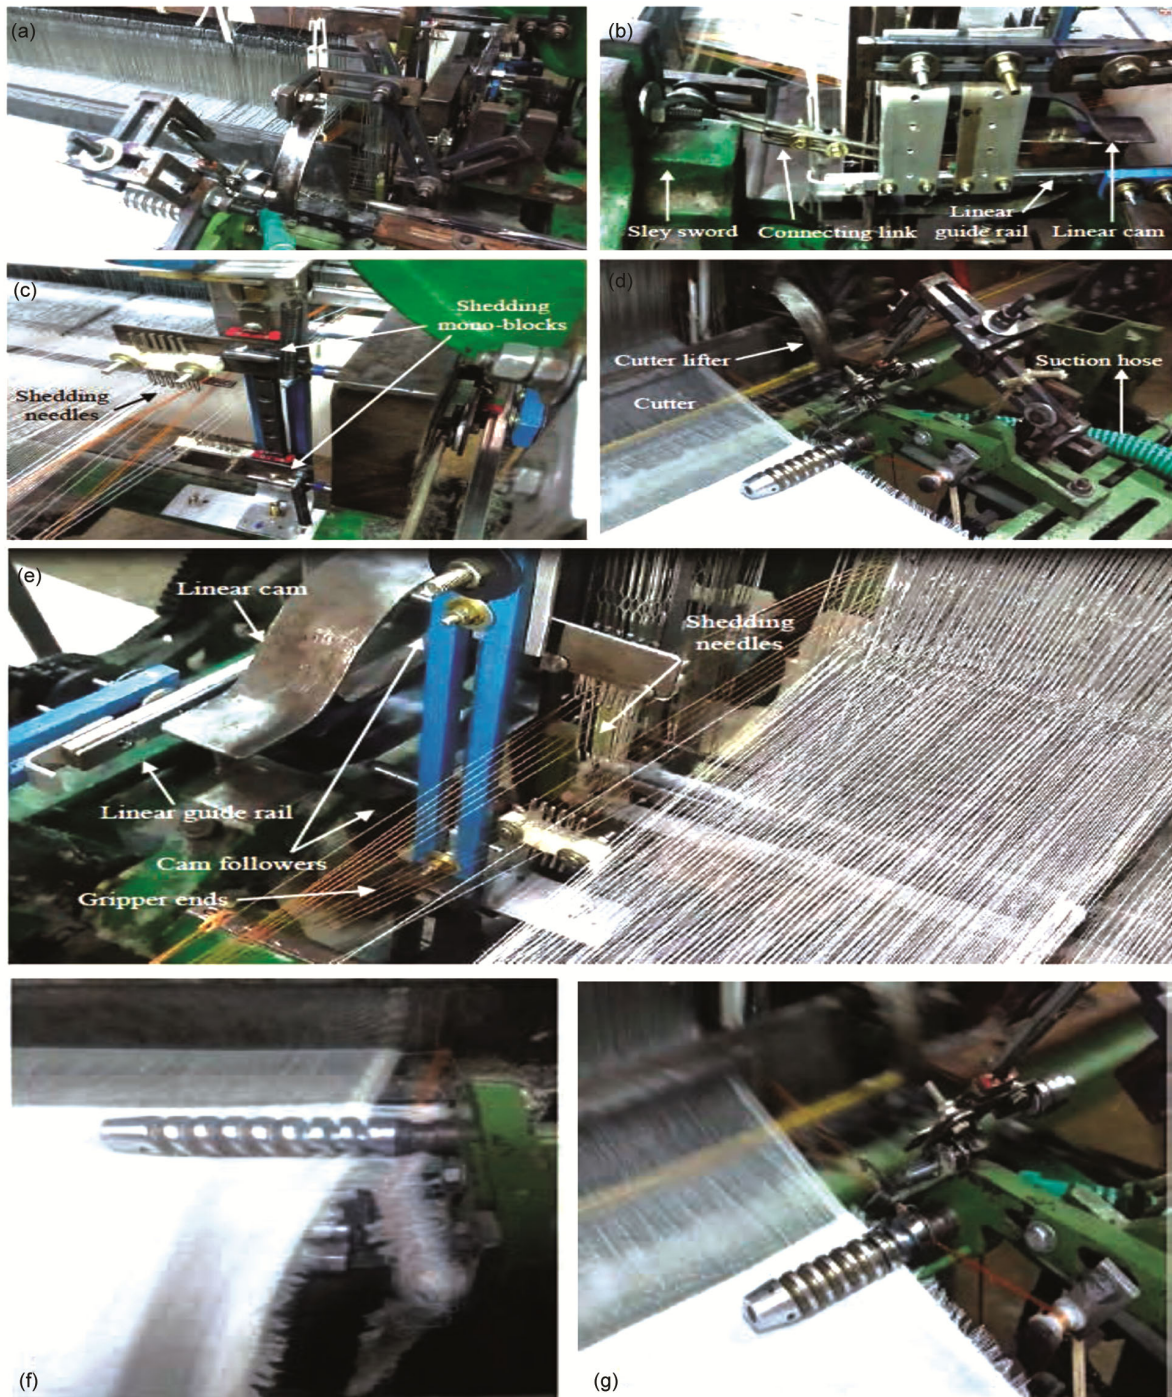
Installed mechanism on the loom and fabric produced with and without the mechanism: (a) mechanism as installed on loom, (b) the linear cam assembly, (c) the shedding assembly, (d) the cutter assembly with suction hose, (e) shedding needles with gripper ends, (f) fabric formed with auxiliary selvage and without mechanism, (g) fabric formed without auxiliary selvage and with mechanism
